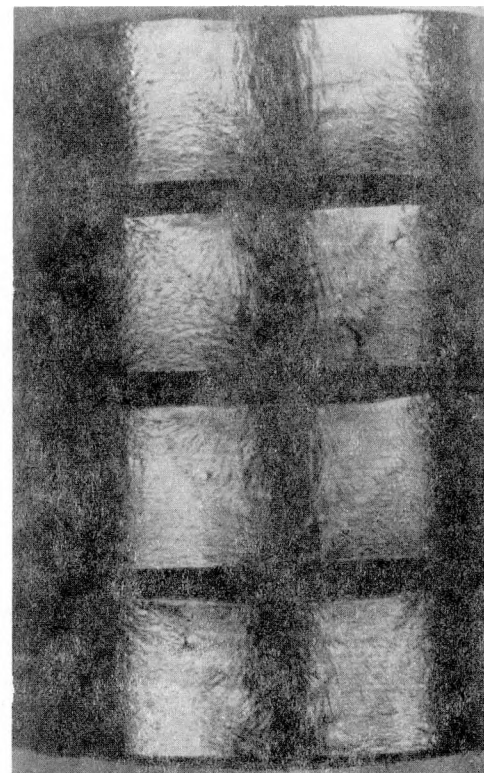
Guided side bend tests from pipe welds deposited with partially ferritic electrode A and fully austenitic electrodes B and C.
